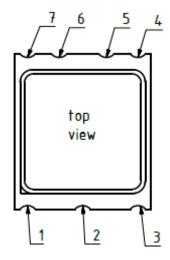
· OXCO I2C Footprint, Surface Mount, 25x22
